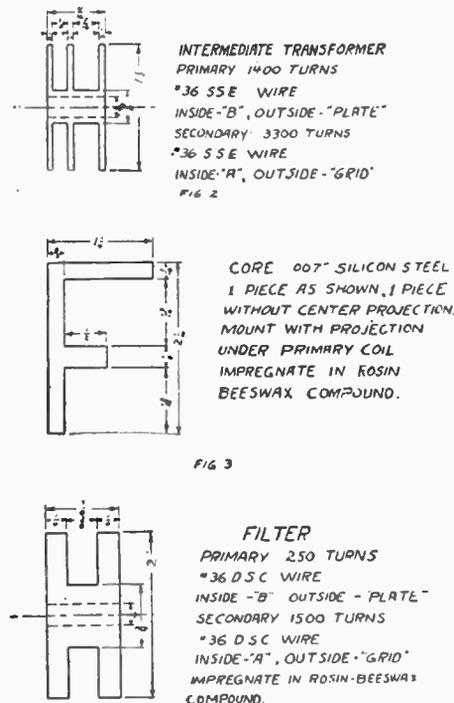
Details of intermediate frequency transformers and filter. aid of a rule and scriber, after which the hole locations should be punched with a centerpunch or nail, and a hammer. After drilling the holes, the panel may be grained
